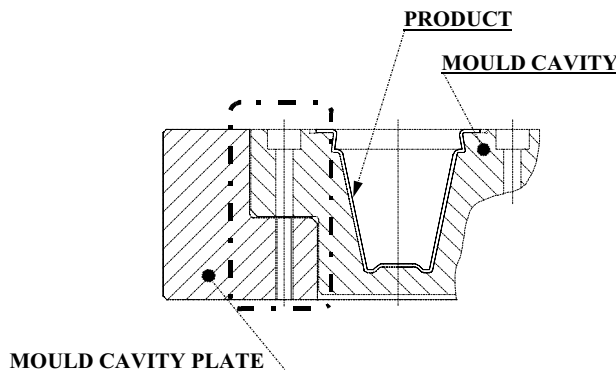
Interactions Between Mould Cavity and Mould Cavity Plate
